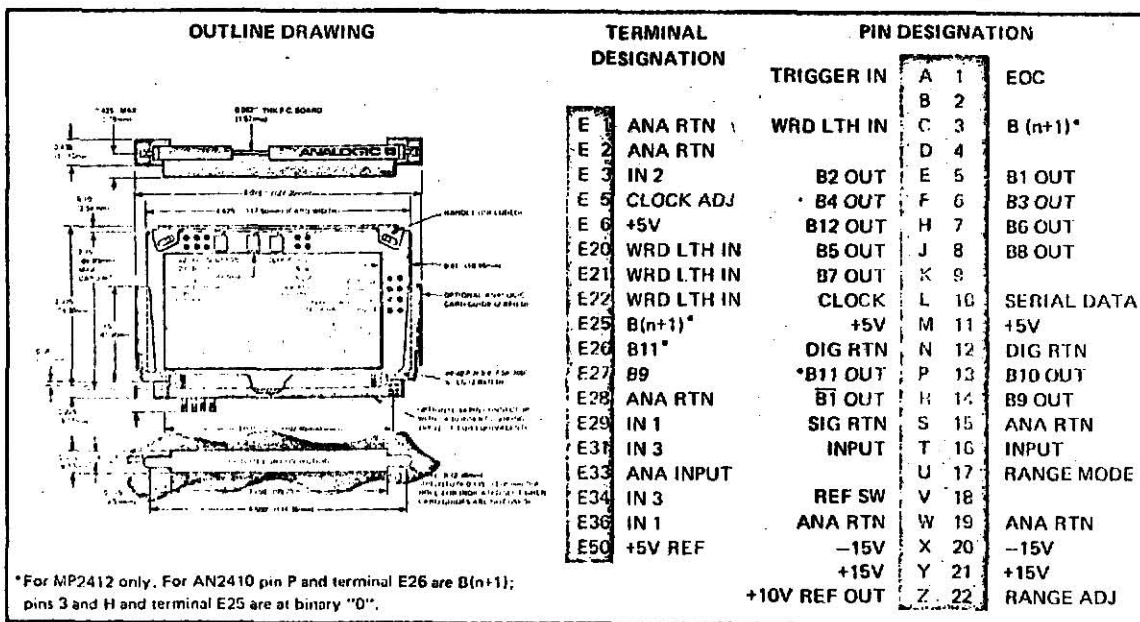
AN24XX Outline Drawing, Jumper Terminal and Connector Pin Diagram.
